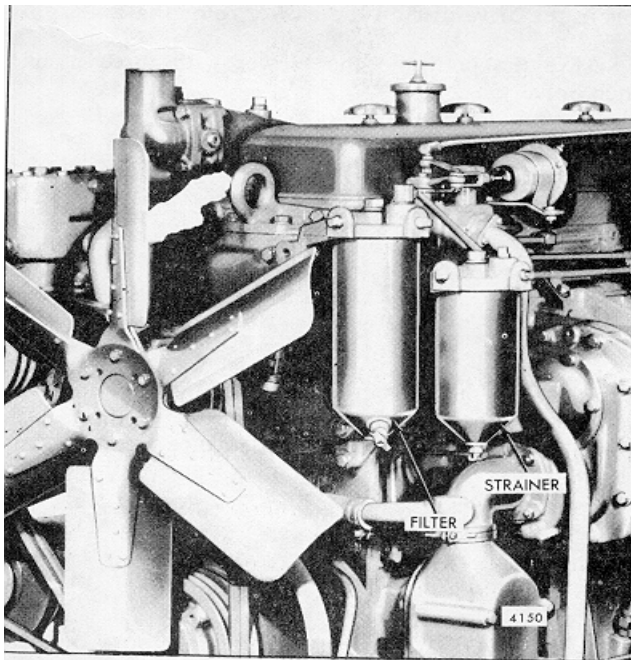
Typical Mounting of Fuel Filter and Fuel Strainer
